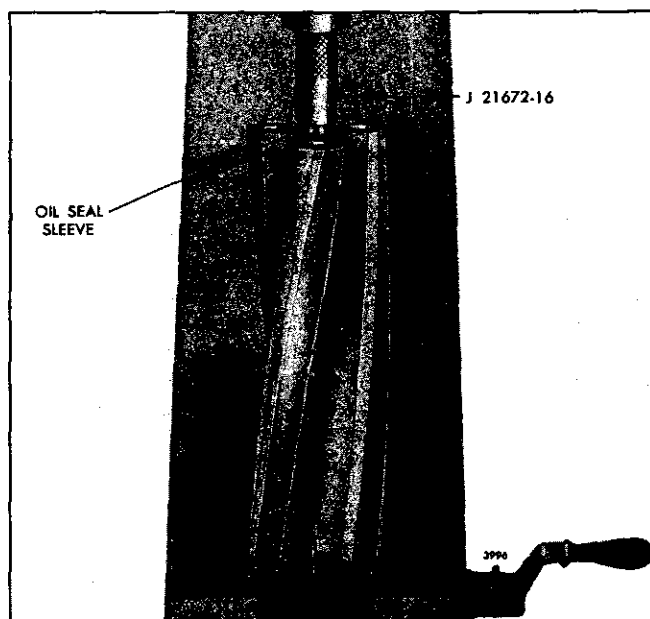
Installing Oil Seal Sleeve on Rotor Shaft
